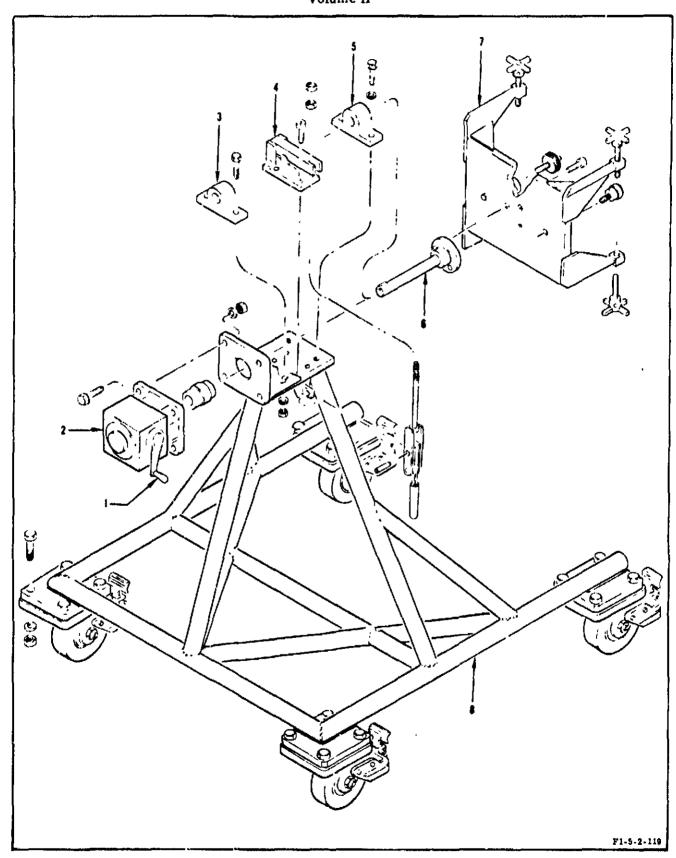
Dolly Assembly T-8101595 (Sheet 1 of 2)
